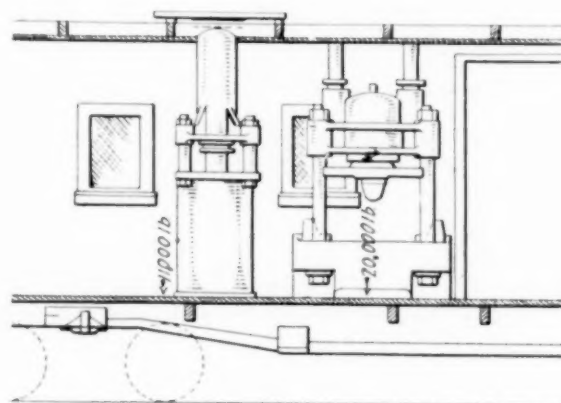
PENNSYLVANIA RAILROAD MACHINE FOR TESTING
